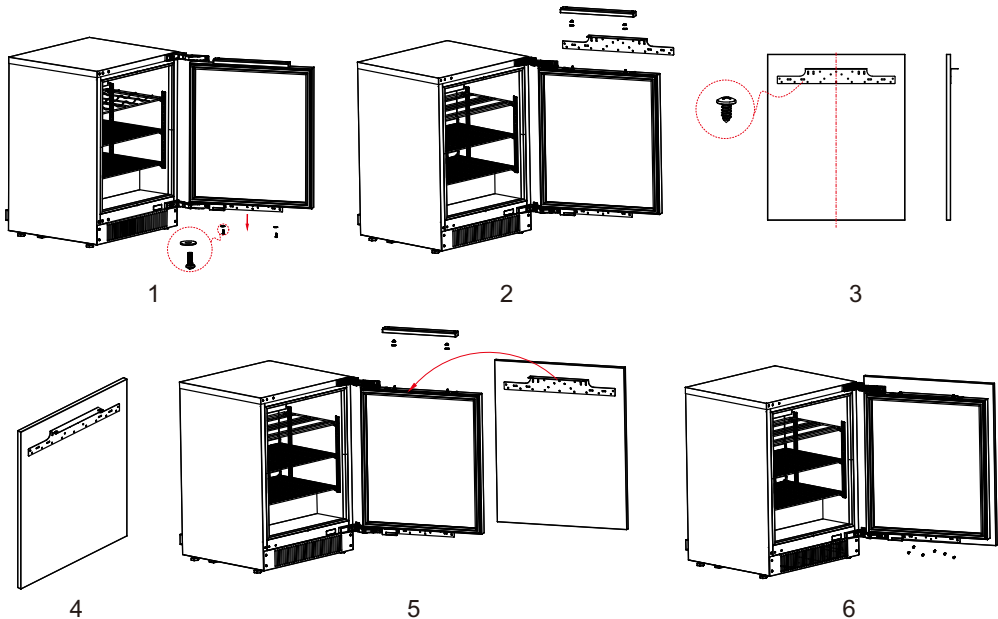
Identification of the décor panel 3-D adjustment brackets and fastening screws.
